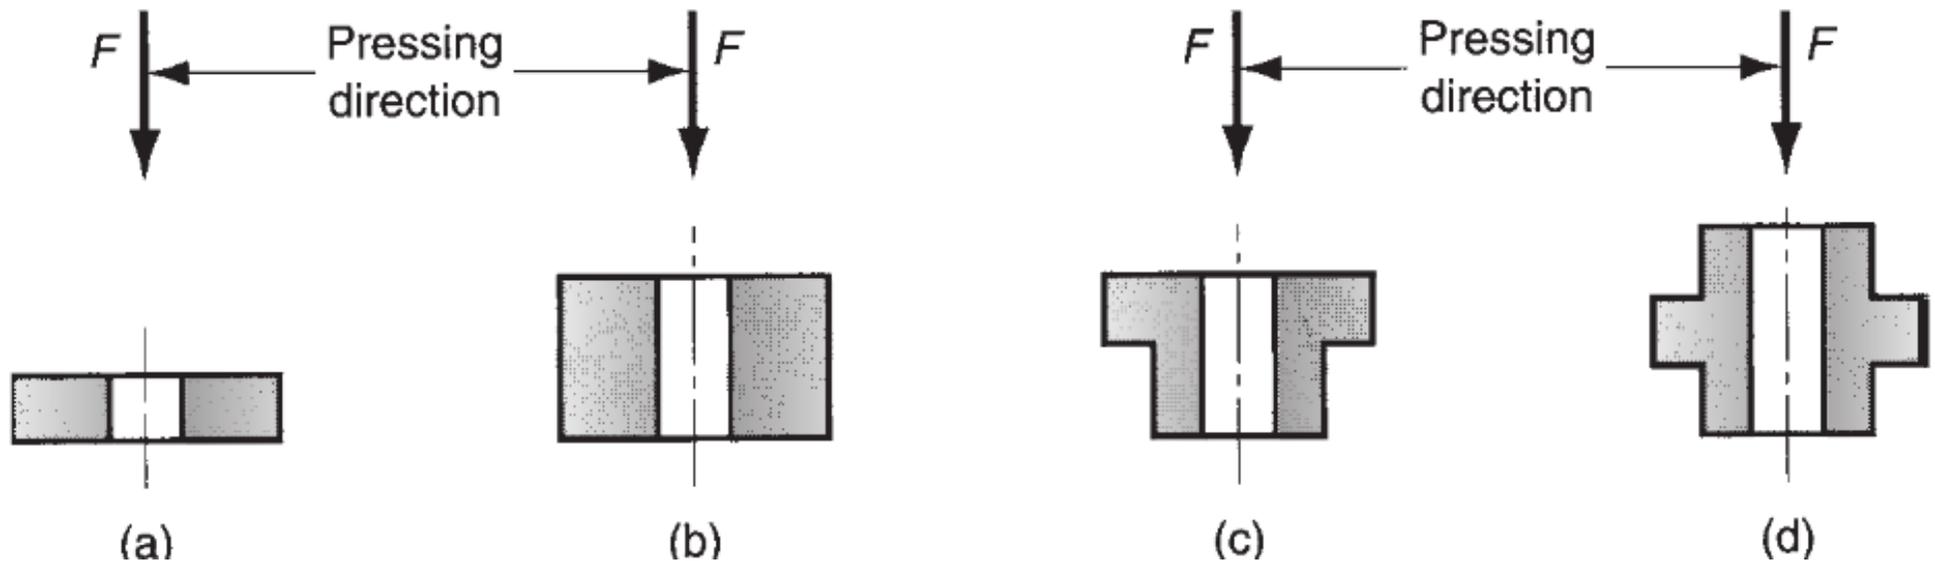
Four classes of PM parts side view shown; cross section is circular (a) Class I—simple thin shapes that can be pressed from one direction; (b) Class II—simple but thicker shapes that require pressing from two directions; (c) Class III—two levels of thickness, pressed from two directions; and (d) Class IV—multiple levels of thickness, pressed from two directions, with separate controls for each level to achieve proper densification throughout the compact.
